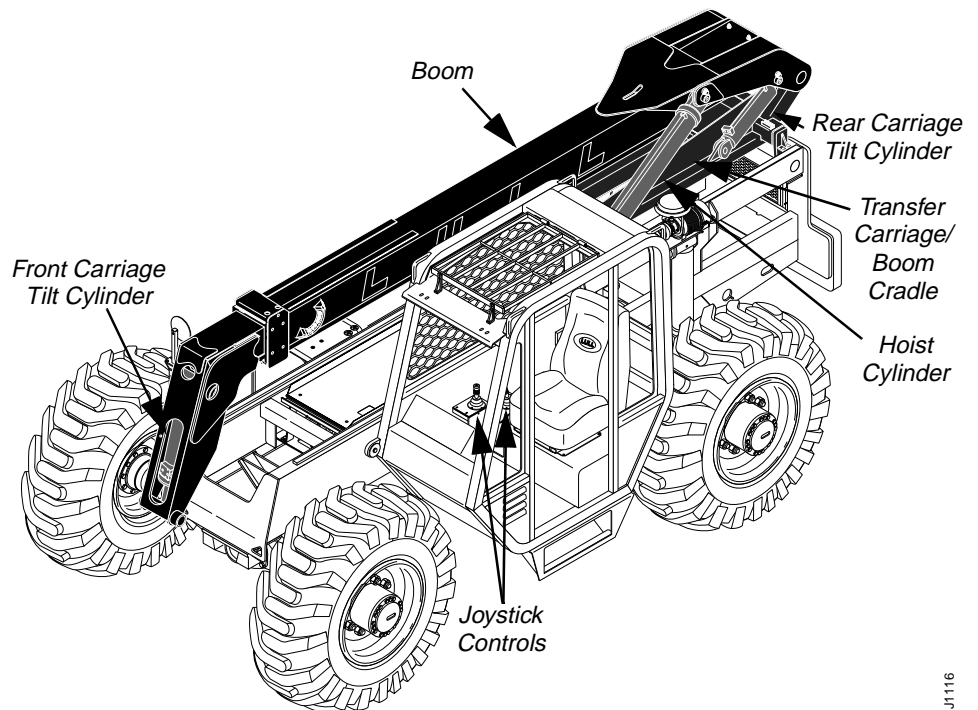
Major Boom and Transfer Hydraulic Components
